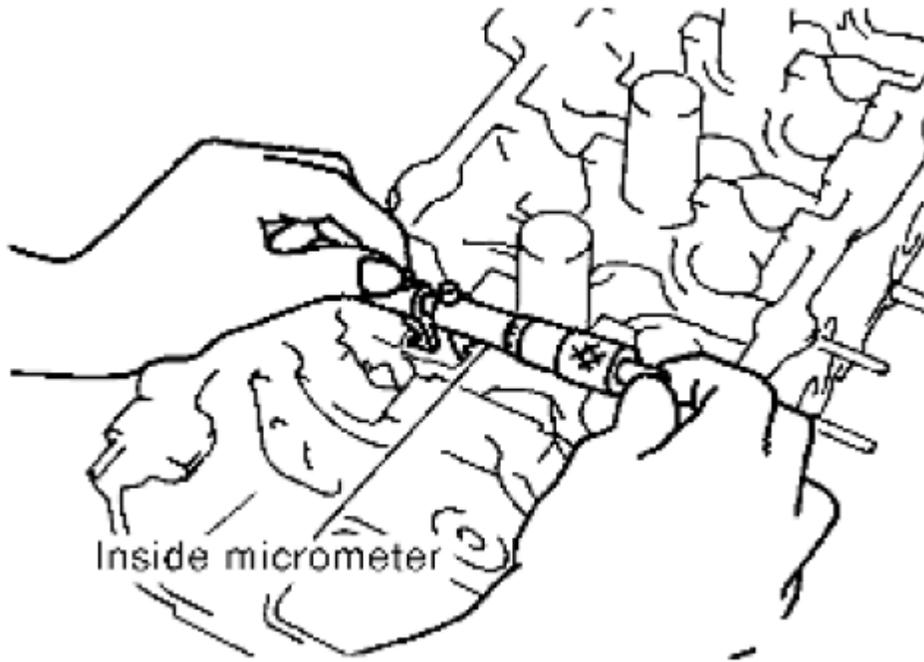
Measuring Diameter Of Valve Lifter Hole Of Cylinder Head Using Inside Micrometer
